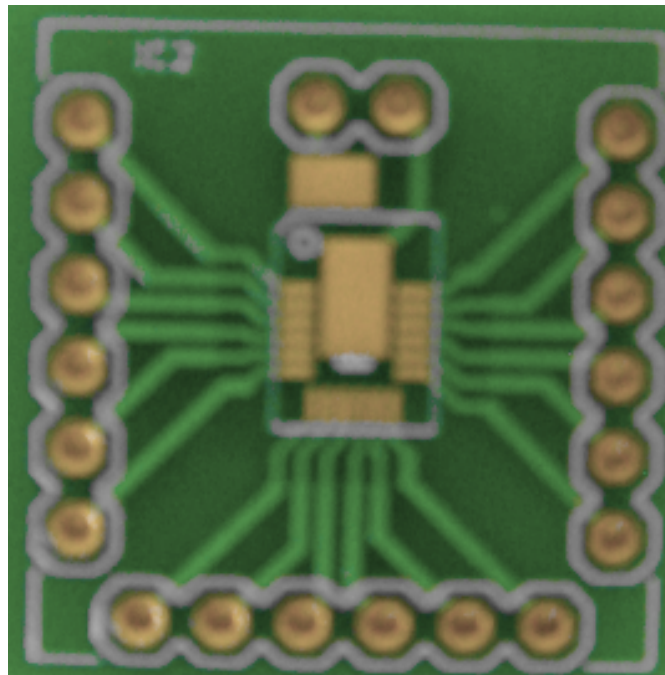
PCB substrate (daughterboard) used to hold the CMOS image sensor.
